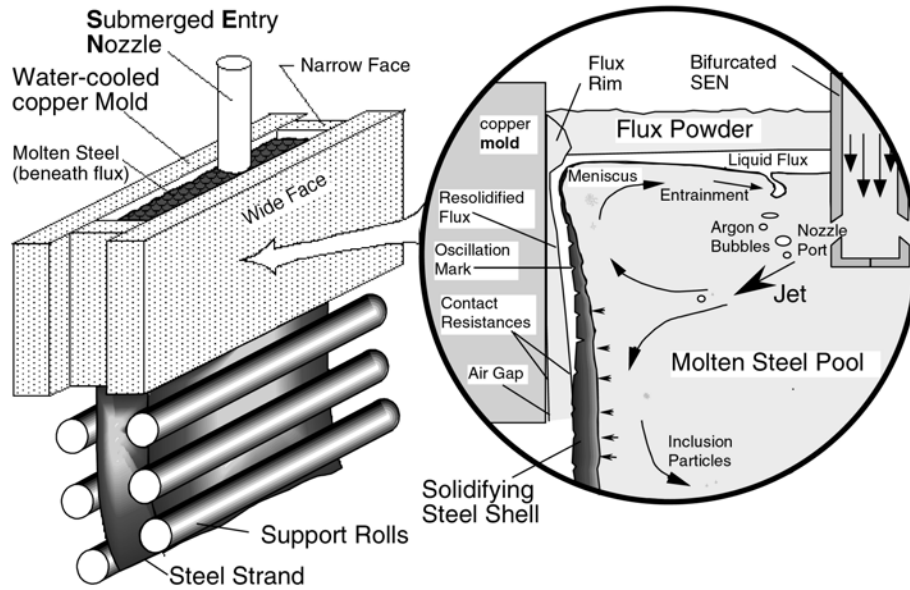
Schematic of phenomena related to heat transfer inside and below the mold during continuous casting of steel^[24].
